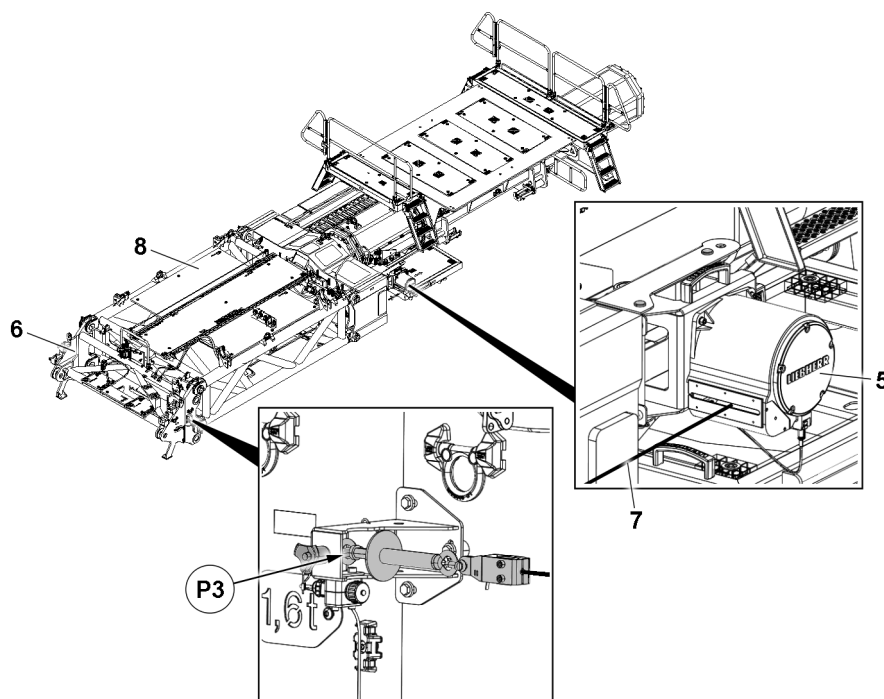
Assembling the length sensor in the operating position – Assembling on the intermediate section
